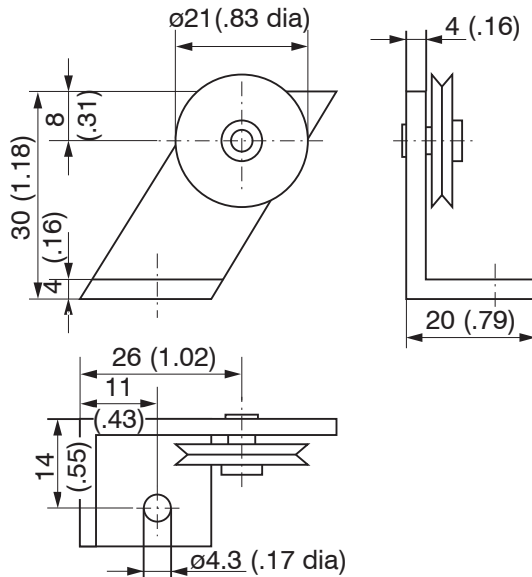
Guide pulley TR3-WDS fix with mounting socket, dimensions in mm (inches)
